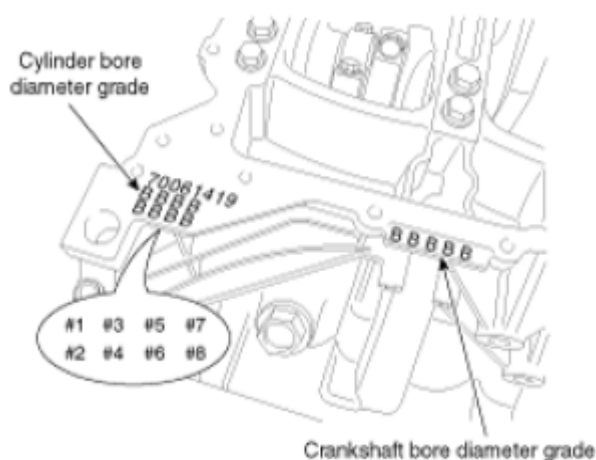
Checking Cylinder Bore Size Code On Cylinder Block
